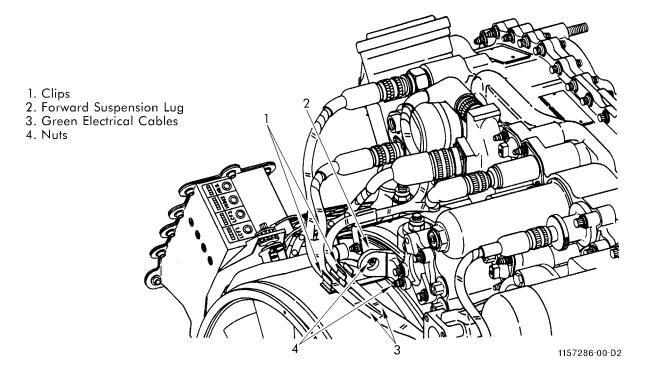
(T700, T701C, T701D) Forward Suspension Lug; Removal and Installation
